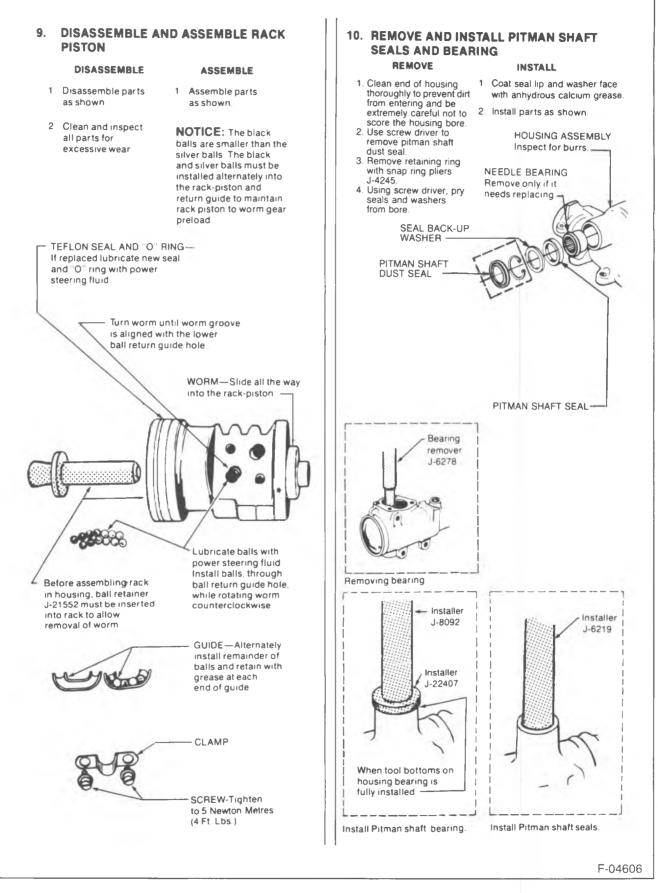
Removing and Installing the Rack Piston and Pitman Shaft Seals and Bearing
